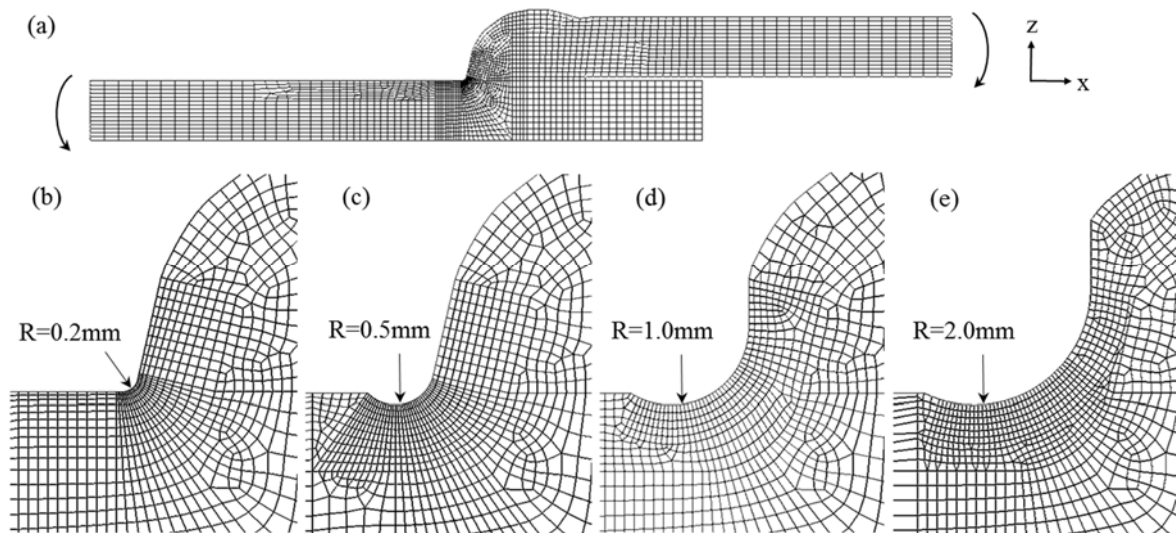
Finite element models. (a) Global geometry, (b) as-welded joint with toe radius of 0.2 mm, (c) toe machined welded joint with toe radius of 0.5 mm, (d) toe machined welded joint with toe radius of 1.0 mm, (e) toe machined welded joint with toe radius of 1.5 mm.
